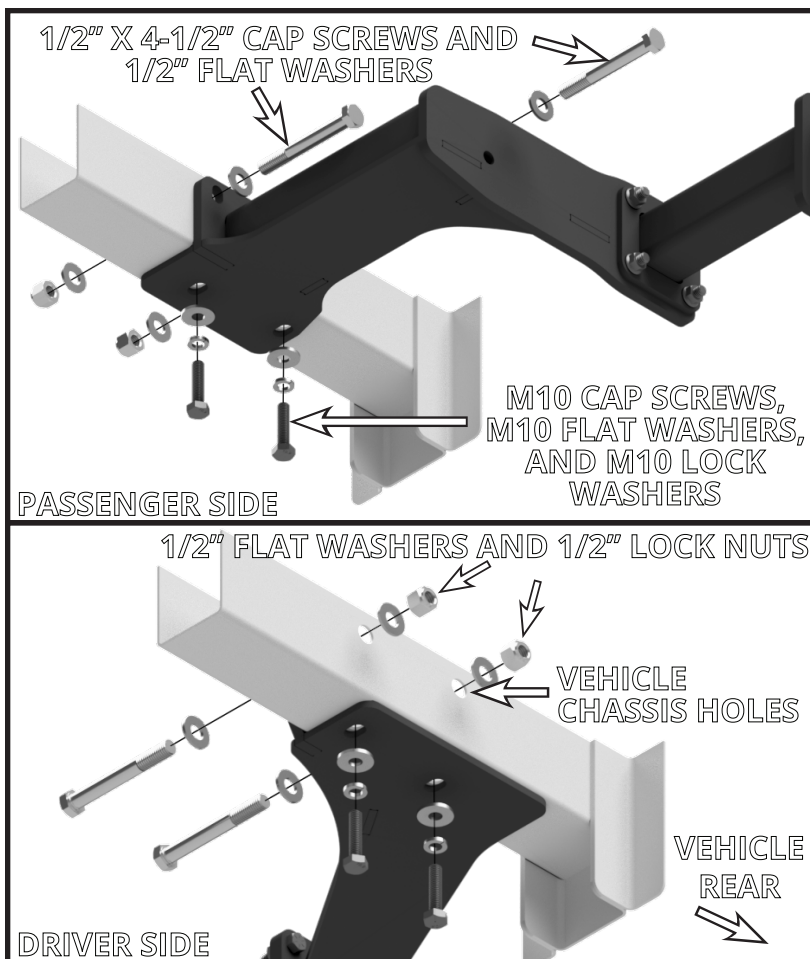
VIEW OF HITCH FRAME ASSEMBLY
